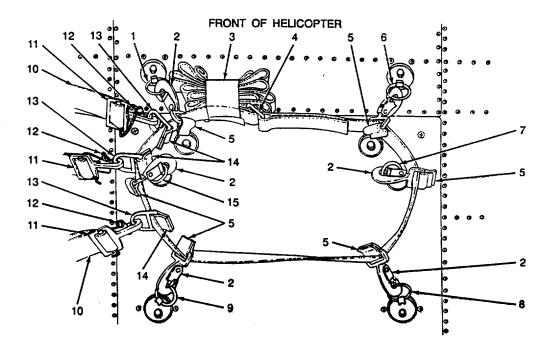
Cargo and Personnel Lowering Anchoring Device Installed on UH-1B Aircraft Floor, Typical.
